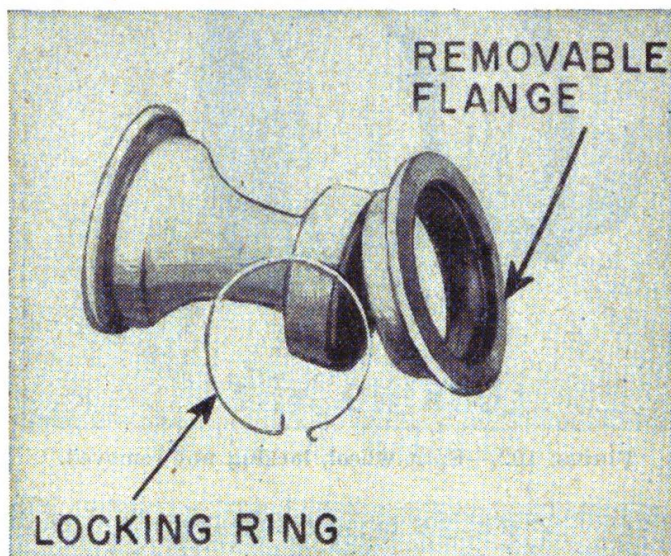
Drop-center wheel with removable side flange, disassembled.
